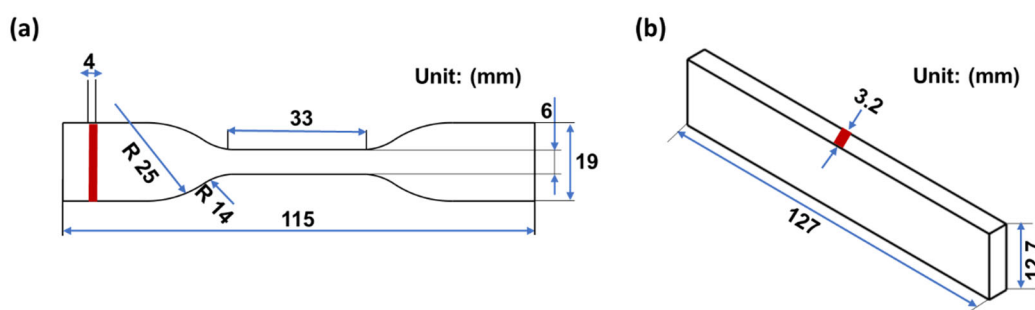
a) Tensile test bar dimensions, b) flexural test bar dimensions
